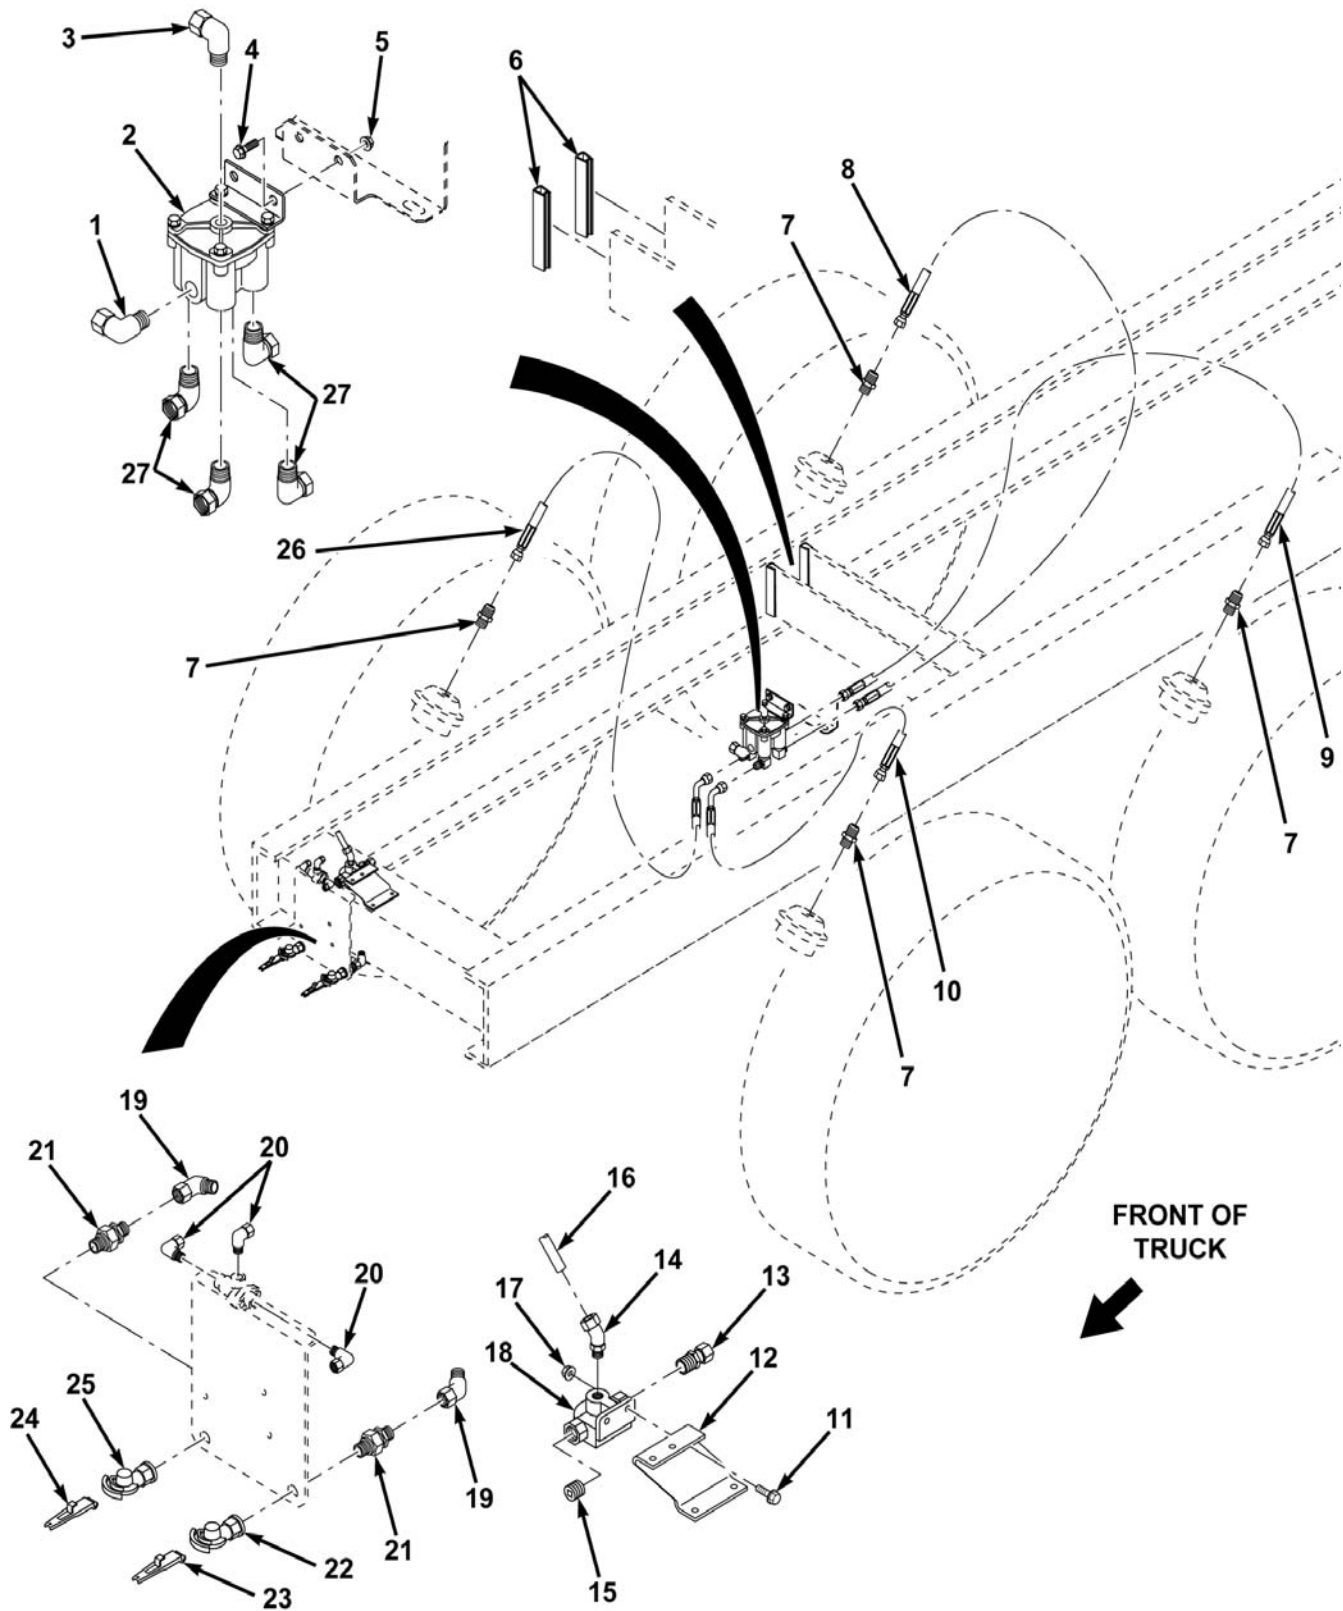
CHASSIS AIR (SHEET 1 OF 15)
